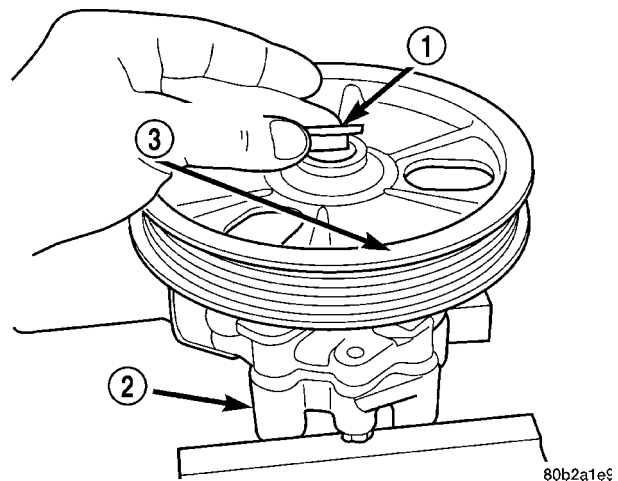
Spacer Installed In Power Steering Pump Pulley
